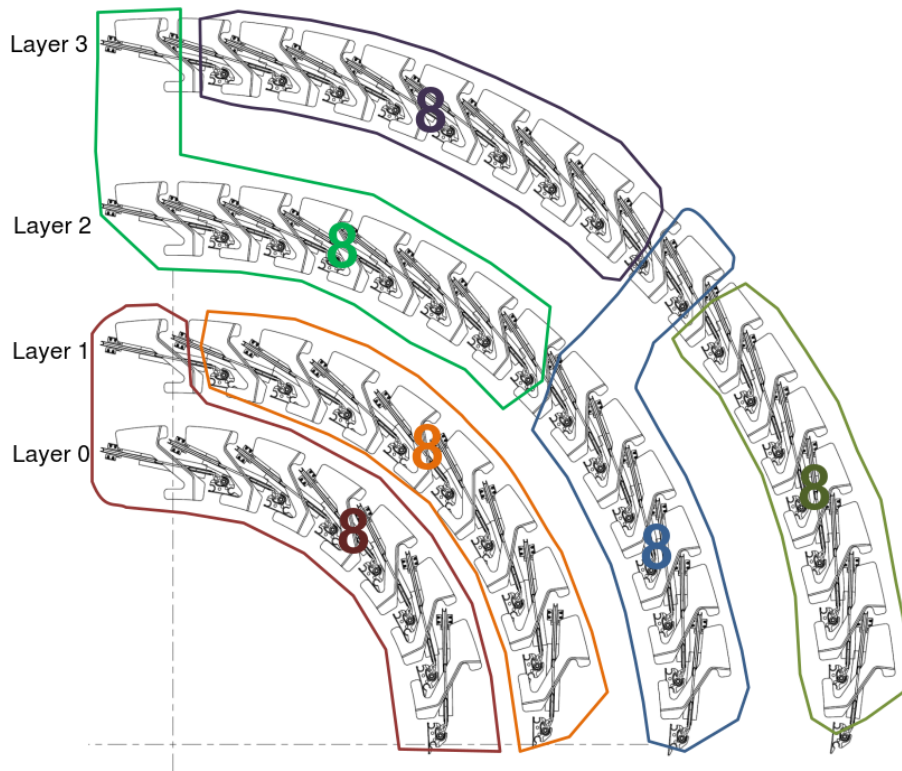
Assembly Sequence of Strip Staves in the Barrel Shells. The coloured frames indicate groups dealt with in the same assembly step.
